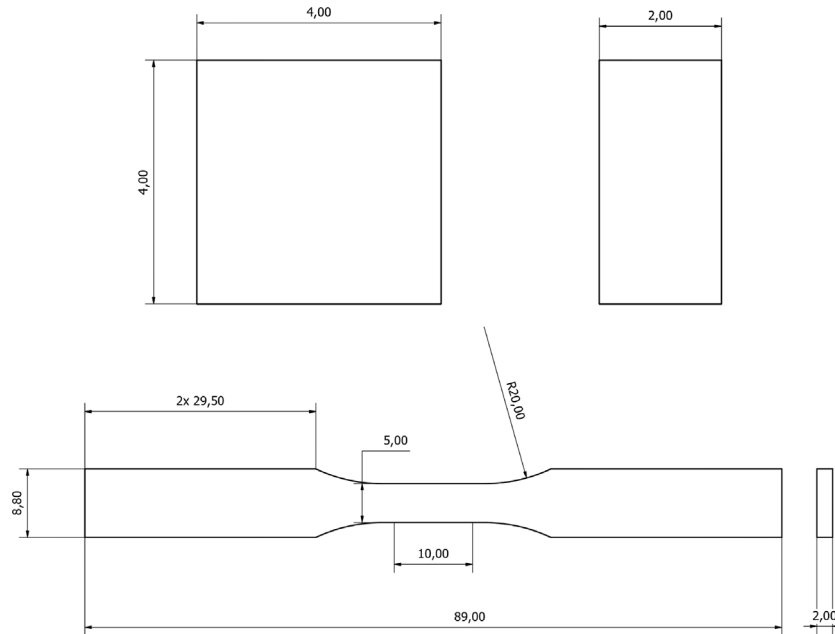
(a) Compression and (b) tensile test specimen dimensions.
